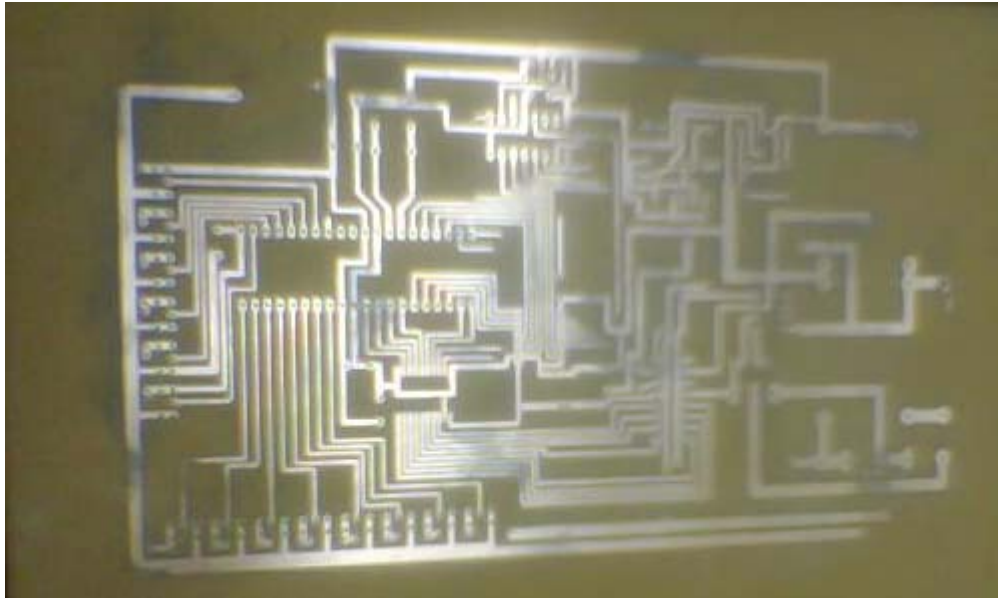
10 Latest Pcb of the Motor Control Circuit
